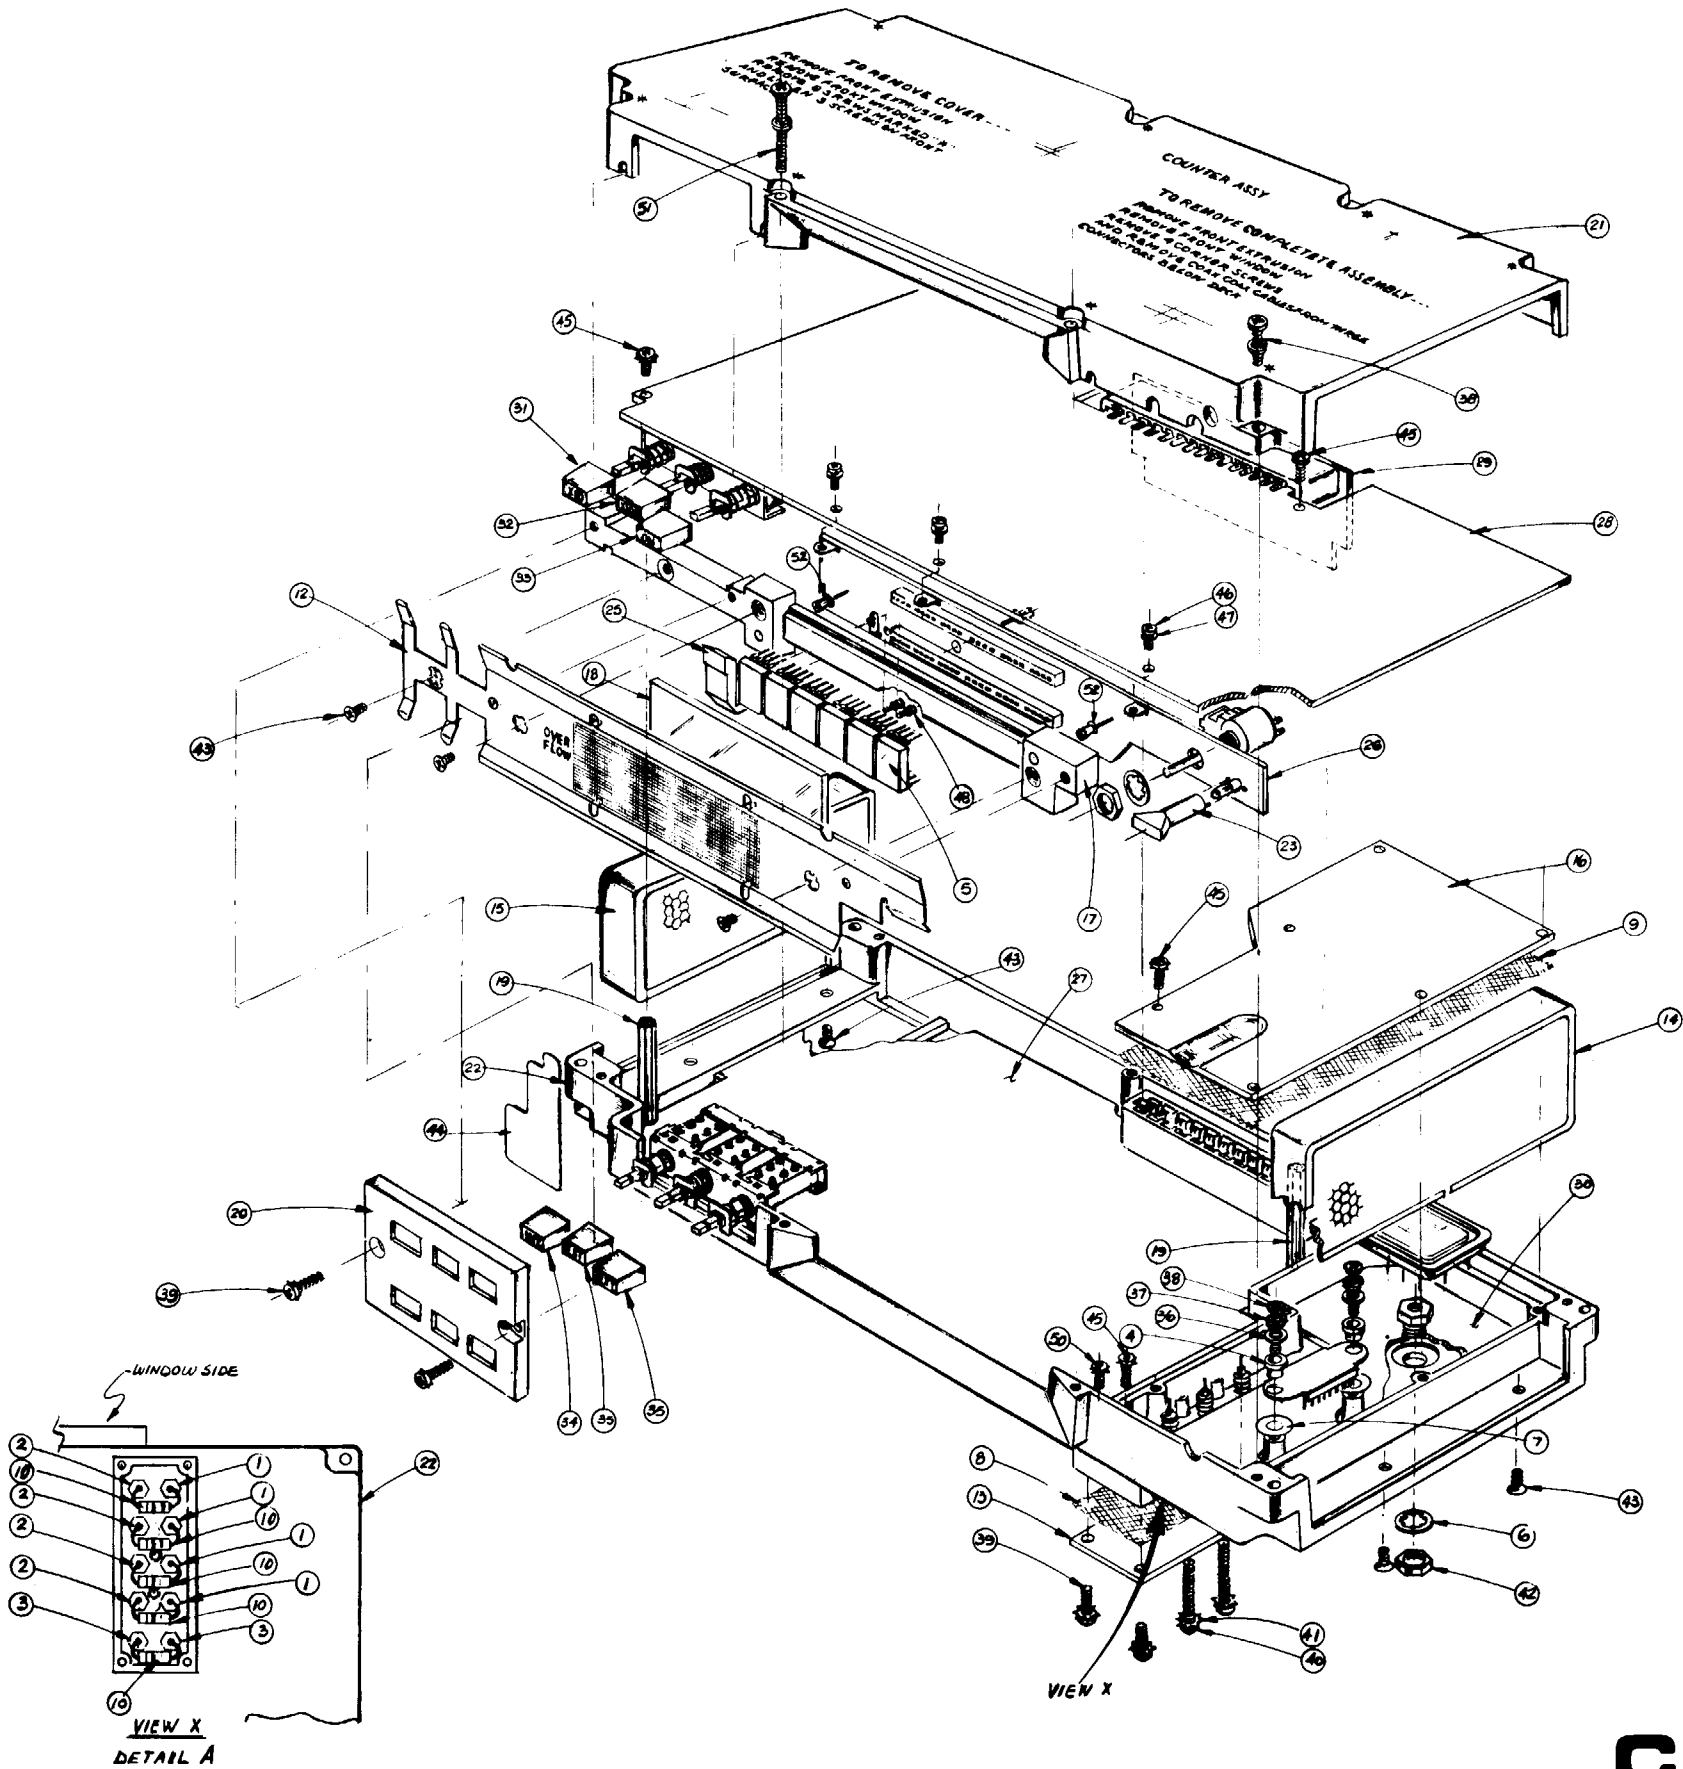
A8 Counter/Lock Assembly Illustrated Parts Breakdown
